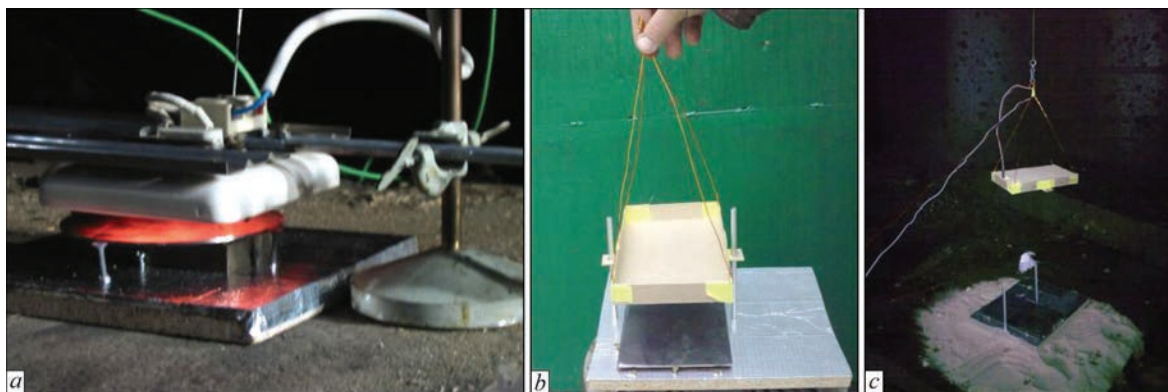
Additional operations during EW of the disk from ODS steels with low-temperature heating: *a* — heating; *b* — explosive box with bottom and guides; *c* — box filled with explosive ready for remote installation
